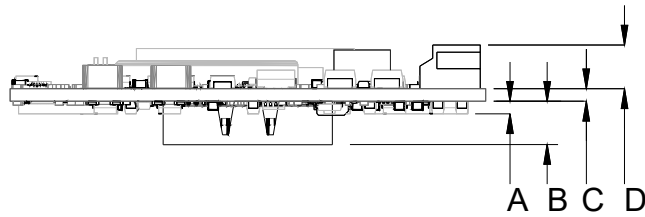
XETK-V2.0A/C Dimensions - Side View
